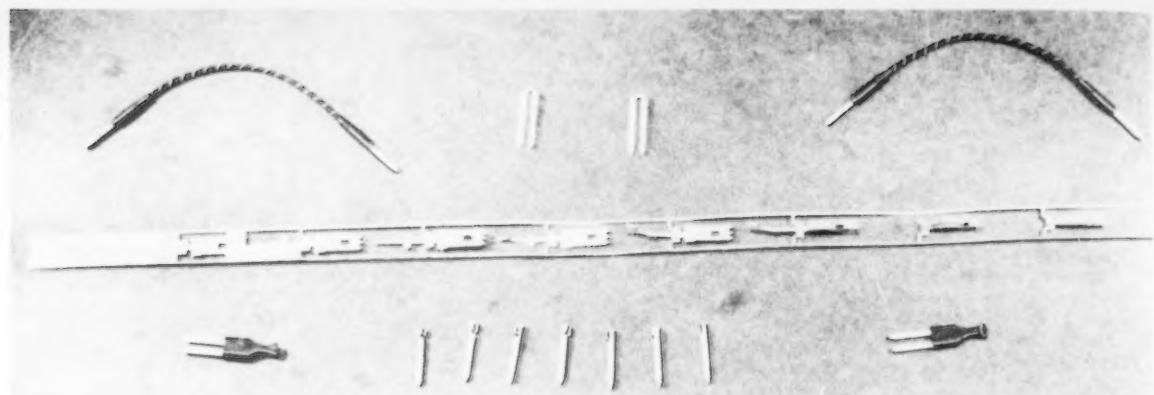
This strip of stock shows the successive stages in the production of the larger brass plug which is 1.422 in. long and 0.175 in. diam. Plugs are shown separately and also assembled to mating parts.
